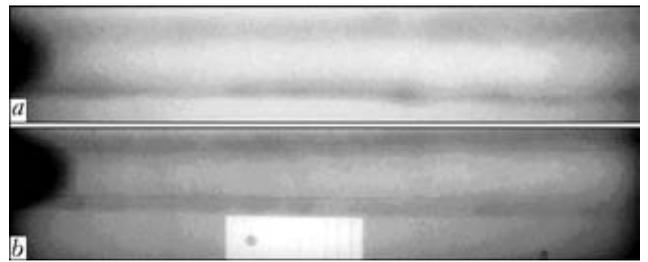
X-ray picture of welds with lacks of penetration at the groove corners (*a, b* see in the text)
